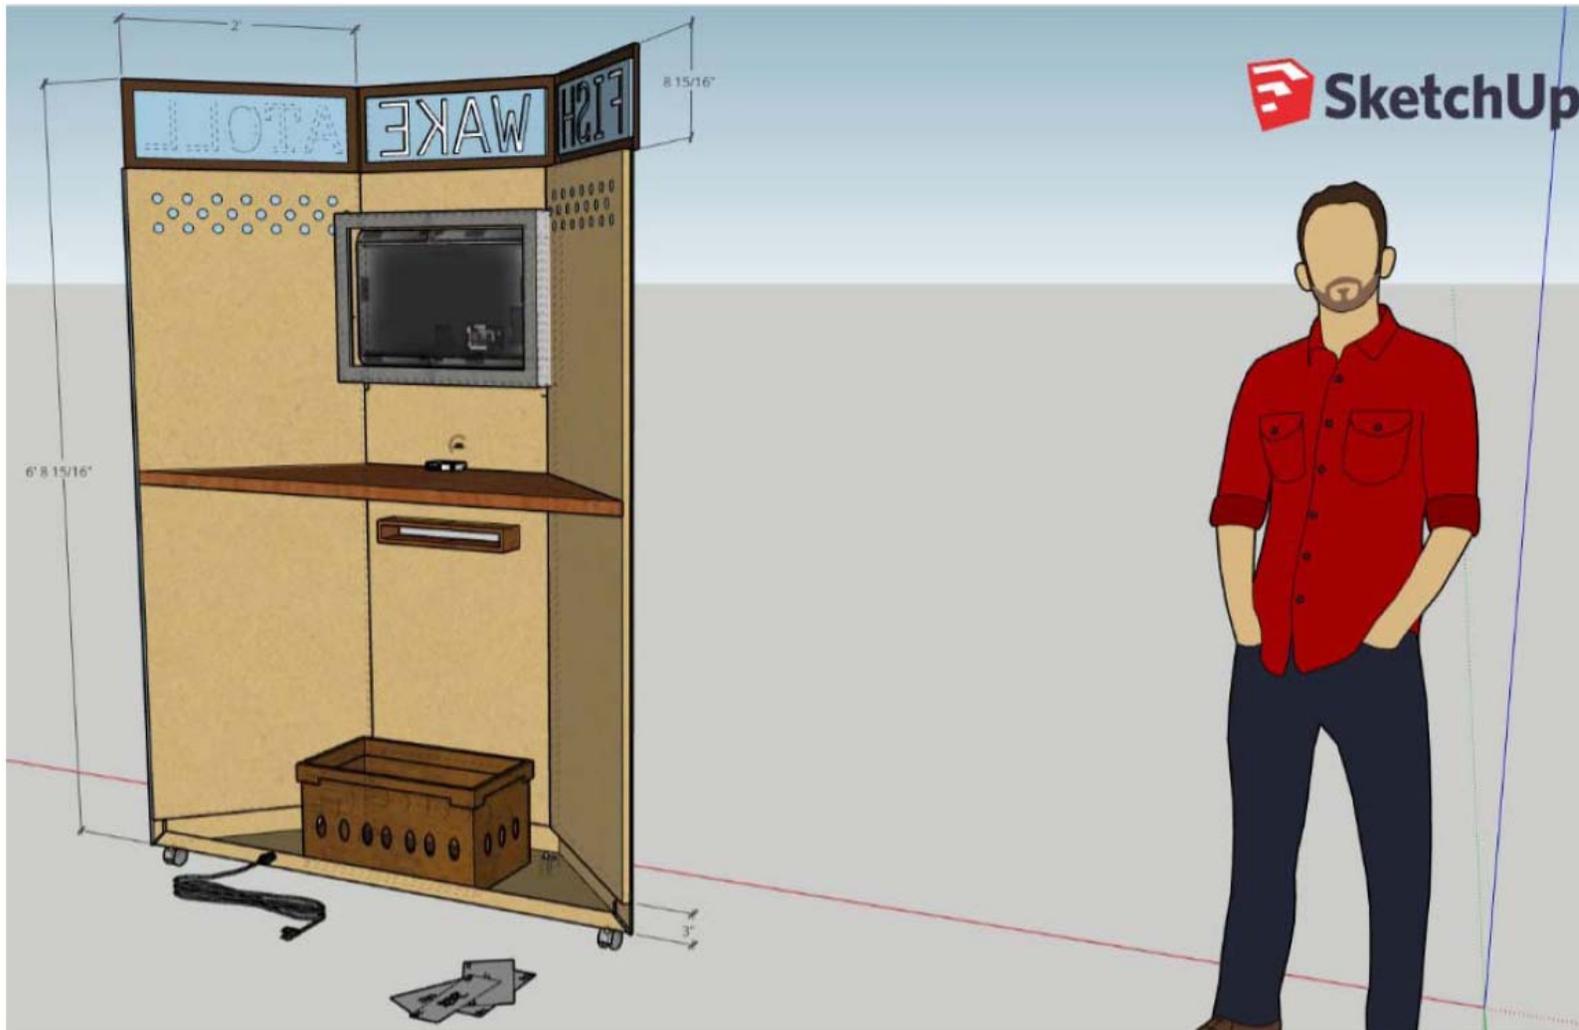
Conceptual design showing with covers removed to provide a view of the inside of the Kiosk. View shows bin for turned in catch reporting cards, screen mounting detail, and a shelf that would have extra pamphlets and catch reporting cards, and would hold electronic hardware.
